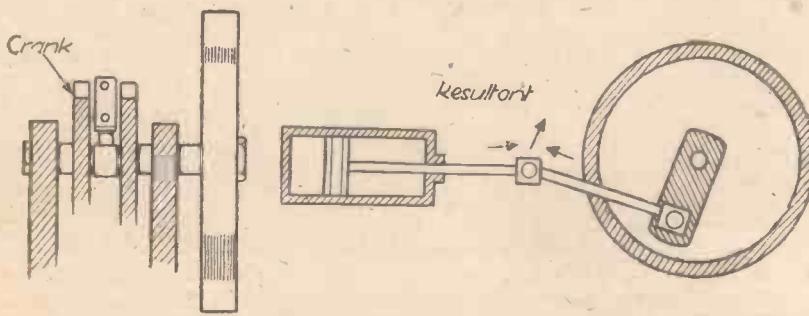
Diagram showing the forces producing side thrust on a piston rod.
